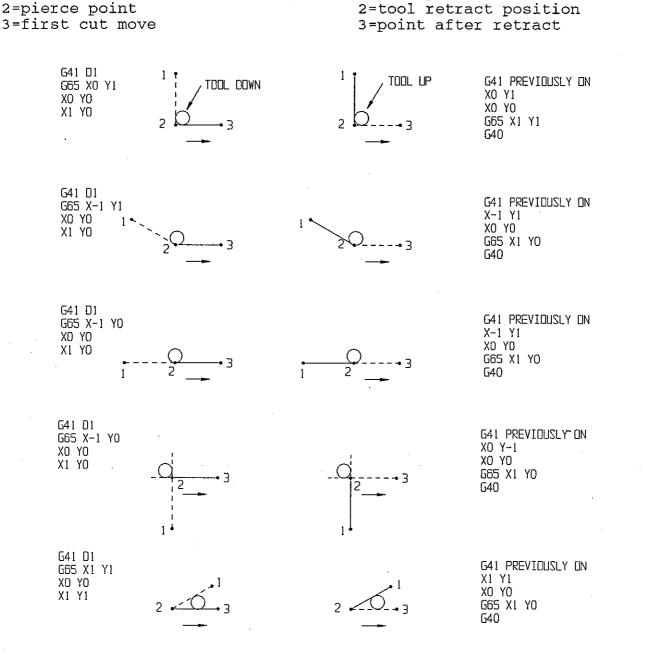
Starting and Ending Cutter Compensation (G41)
